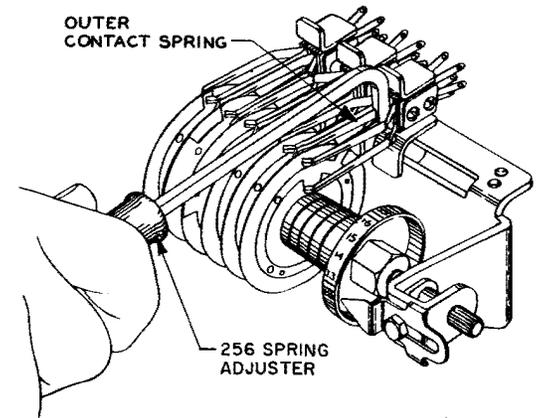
Method of Adjusting A Cam Roller Spring
